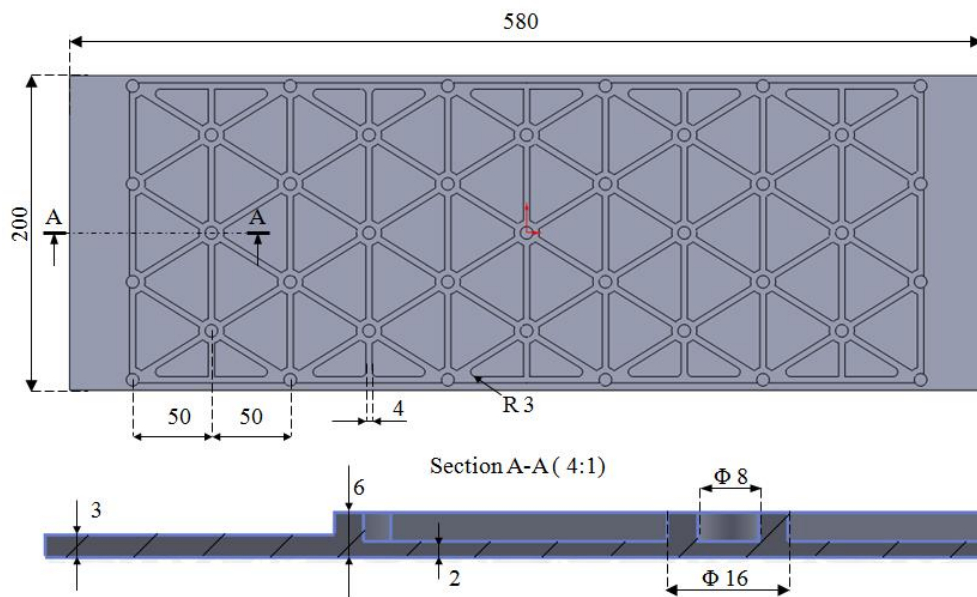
AA2219 isogrid workpiece geometry. (all dimensions in mm)
